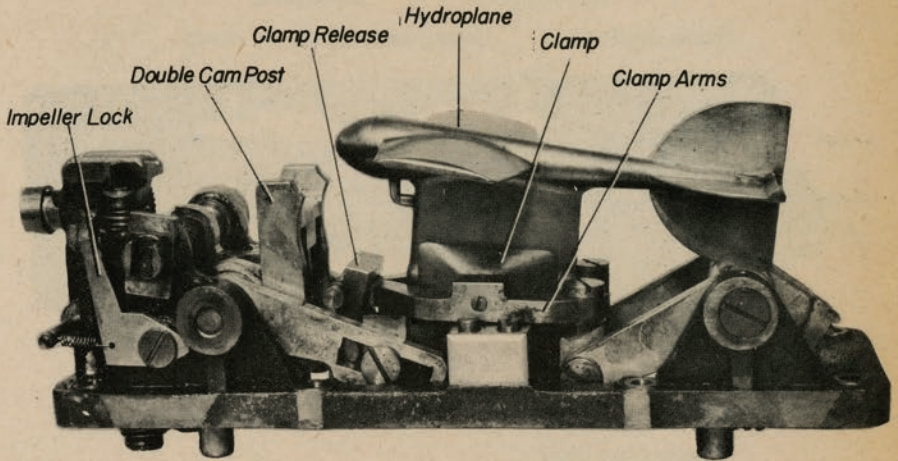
Hydroplane Elevating and Releasing Assembly, Before Safety Run
